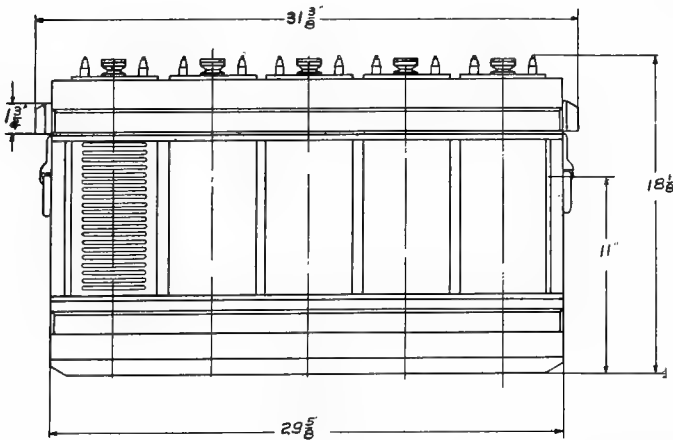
Tray Dimensions Five Cells Type A-8 H.
